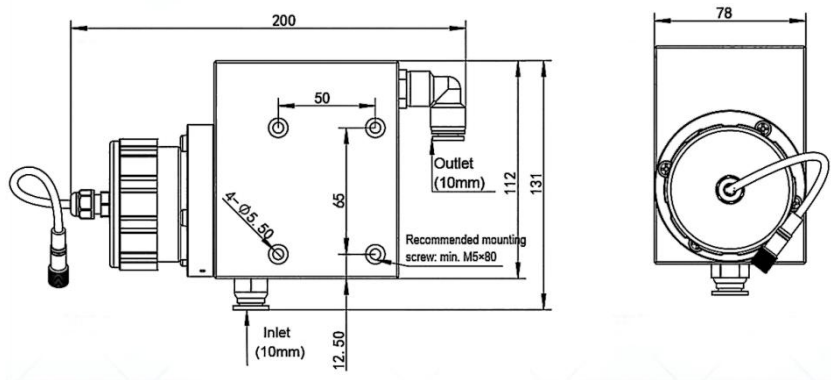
High range quick-connect fitting dimensions (unit: mm)
